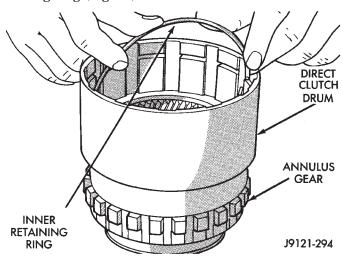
Installing Clutch Drum Inner Retaining Ring
